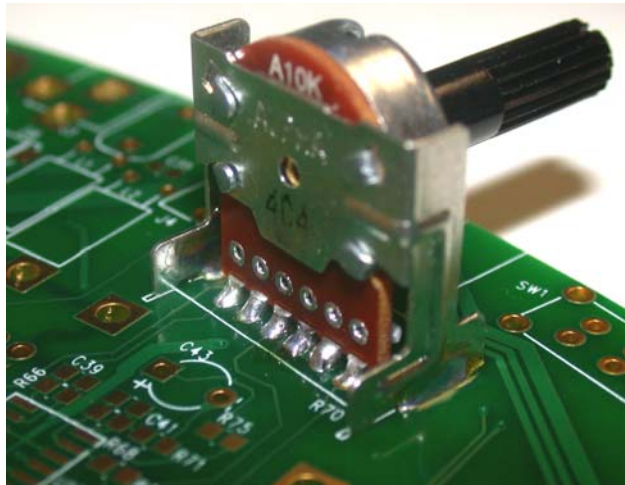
Make sure pot is flush and straight before soldering to PCB.
